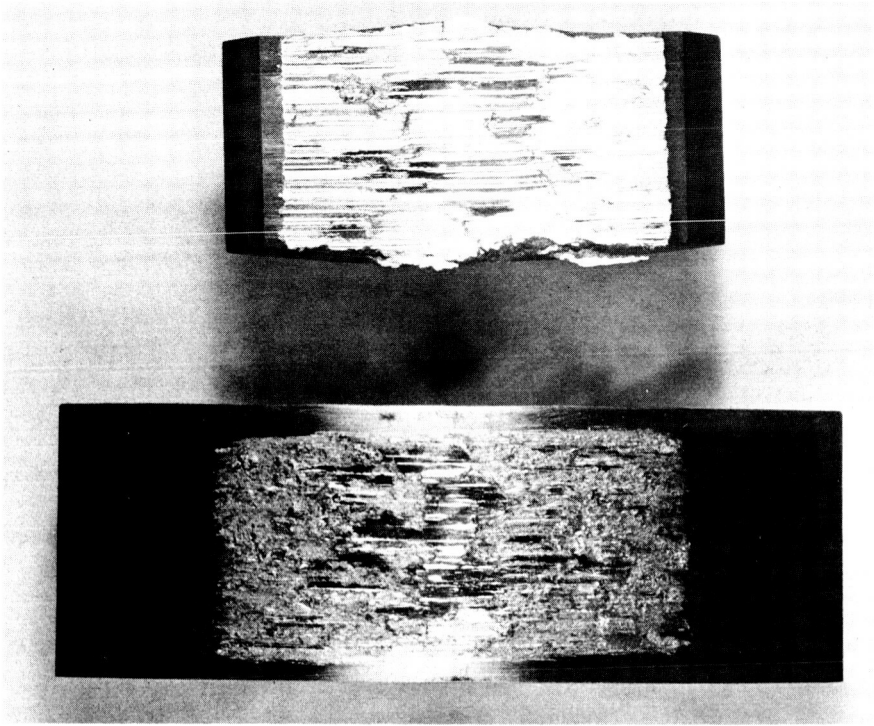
BALL JOINT TEST SPECIMEN TYPE - 15;
